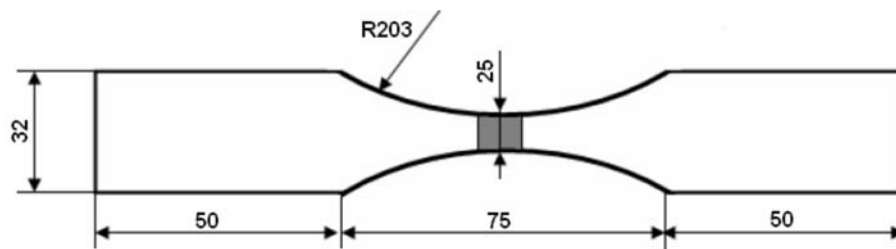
Configuration and dimensions of fatigue test specimen (all dimensions in mm).
